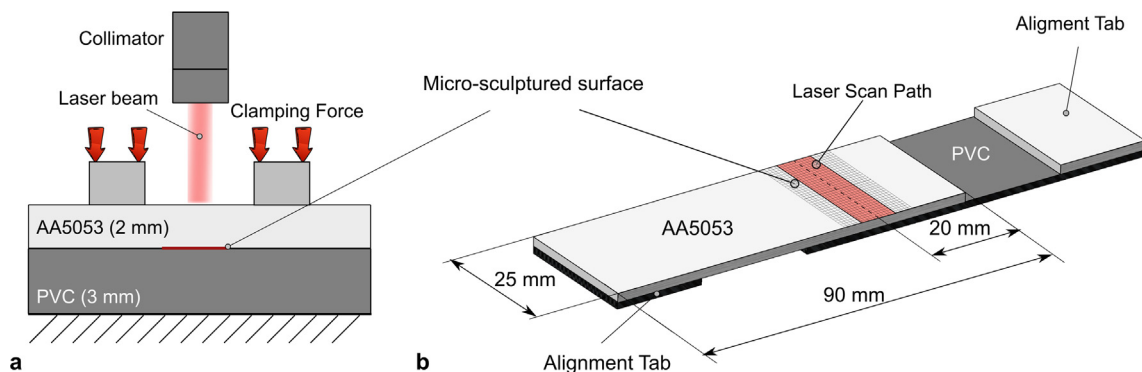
(a) Schematic representation of the laser assisted joining setup and (b) main dimensions of the specimens used for single lap shear tests.
